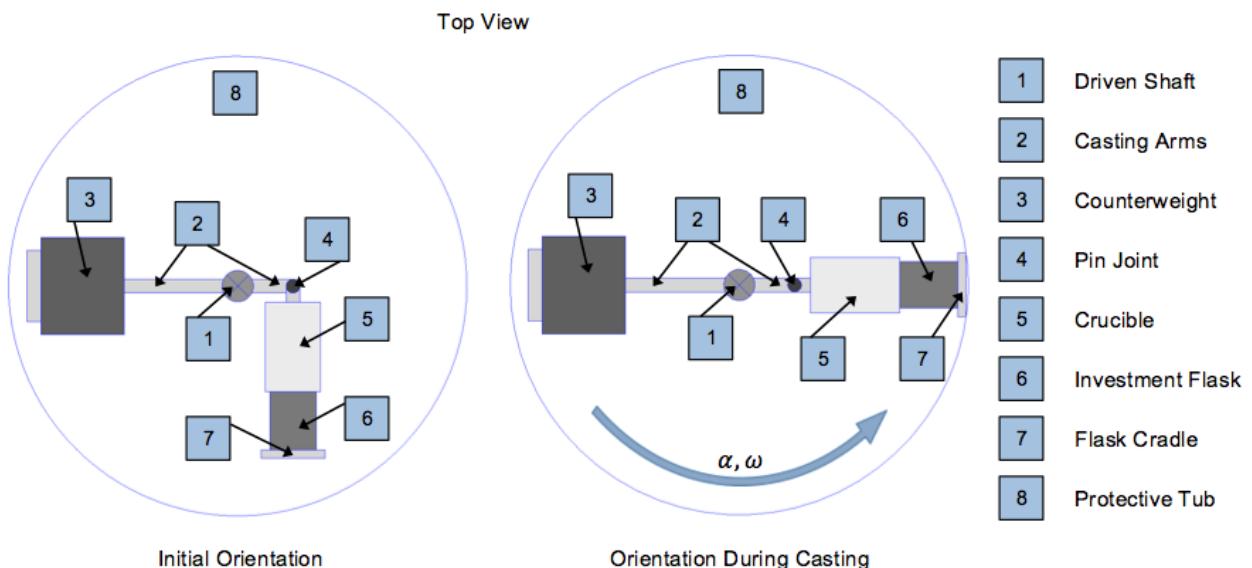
Schematic (top view) of a centrifugal casting machine and its components
